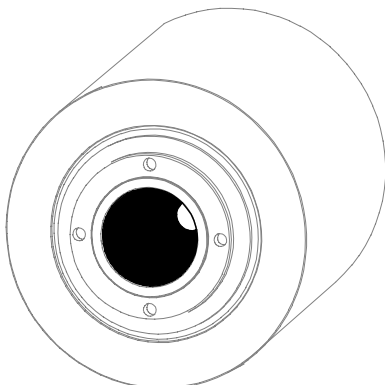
3. Conical surface of the ISO spindle shaft (highlighted in black)
